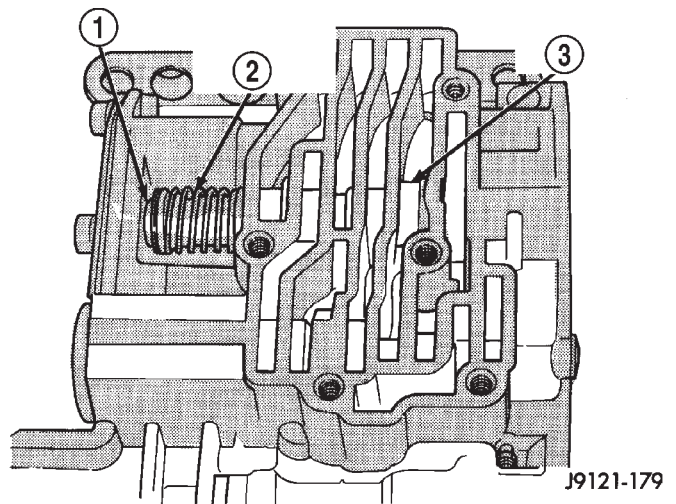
Shuttle Valve E-Clip And Secondary Spring
